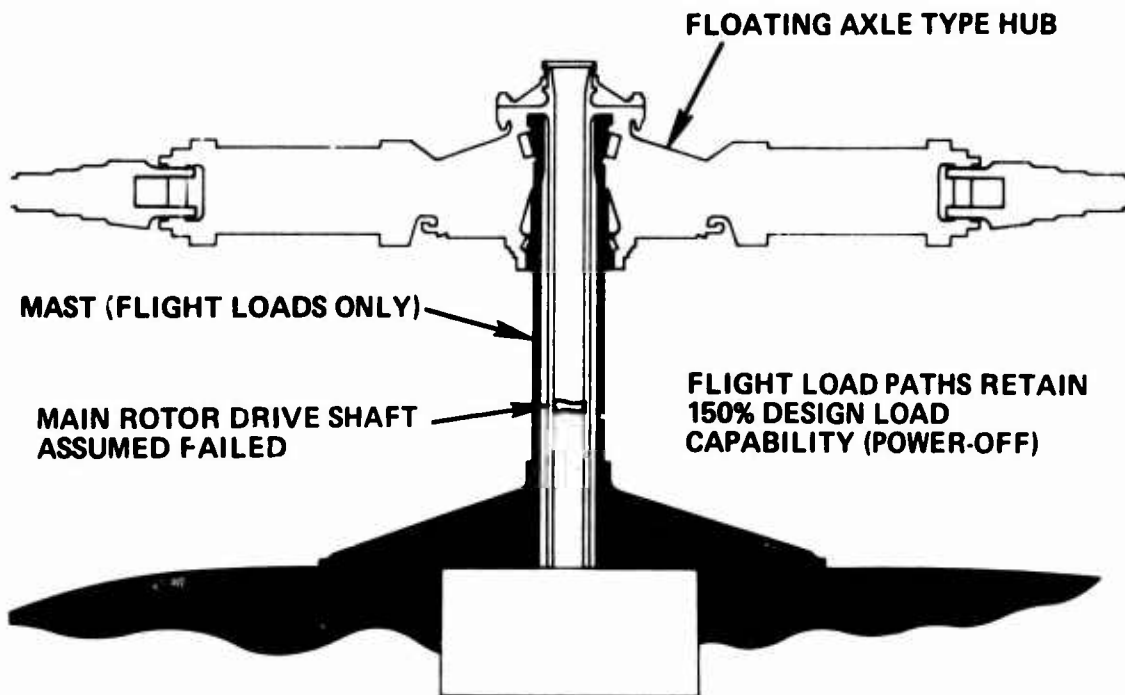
OH-6A Main Rotor Drive Shaft and Floating Axle Type Hub.
